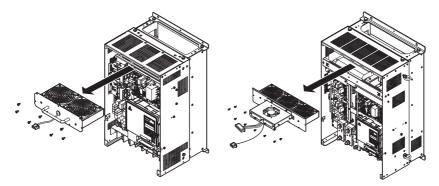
Removing the Fan Unit: 2A0169 to 2A0415, 4A0139 to 4A0362
